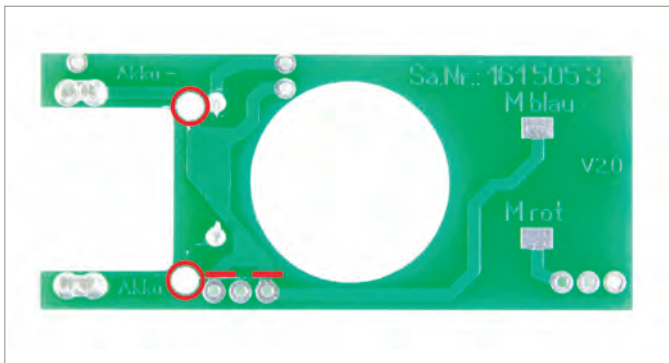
Cut the circuit traces on the universal board; batteries are connected
